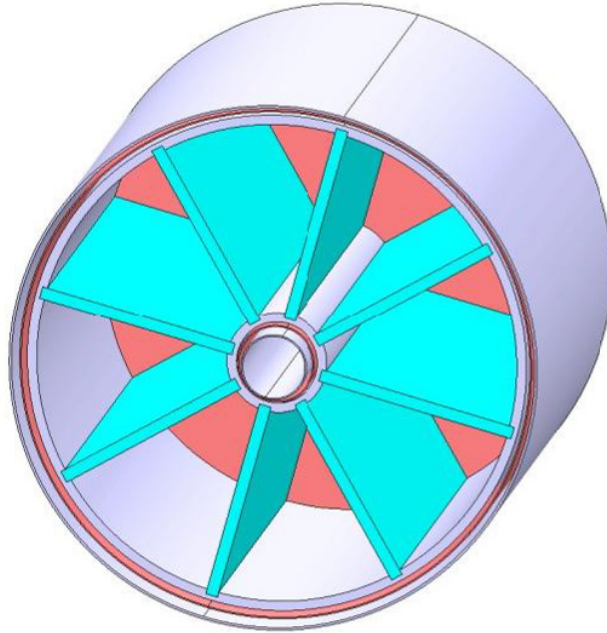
CAD drawing for a 2T air core toroid with 20 cm bore and a size about 1 m³
